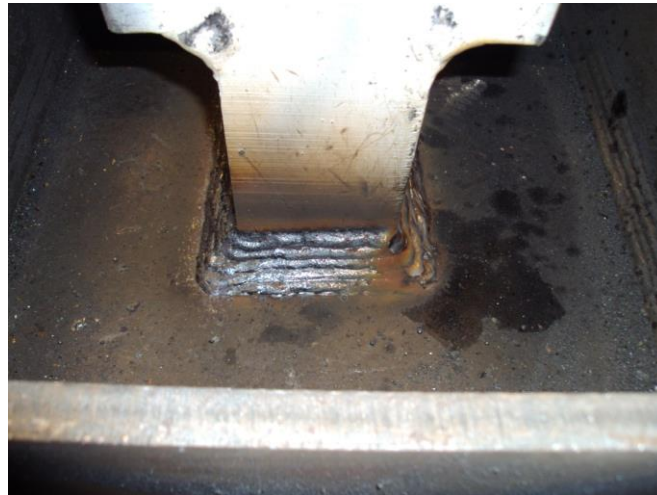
Weld connecting the base of tilt cylinder's lifting eye fixation system with a gob shield top plate [12]
